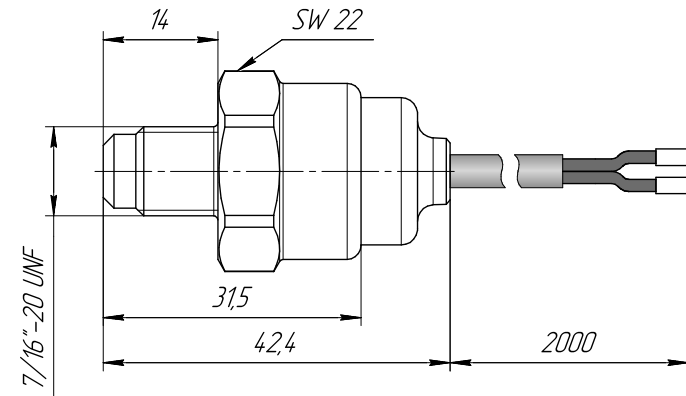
Technical drawing of the model FP-PT-10(35) A(W)
